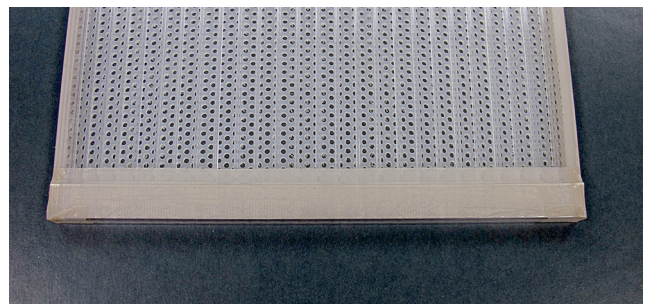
A strip of Teflon tape is run across the two end caps on the bottom of the platen to create a seal.
